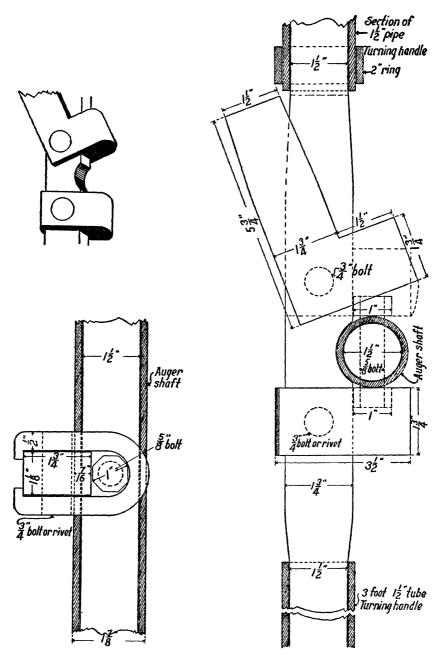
Turning handles. a, One type of locally made turning handle for the bolt shaft, hammered out by a blacksmith. These can also be made of cast iron; b, another type of locally made handle for the bolt shaft. The head of a bolt on the shaft enters the socket r, and the nut on the opposite end fits into notch n; c, a turning handle that can be made locally or purchased ready-made from dealers.
